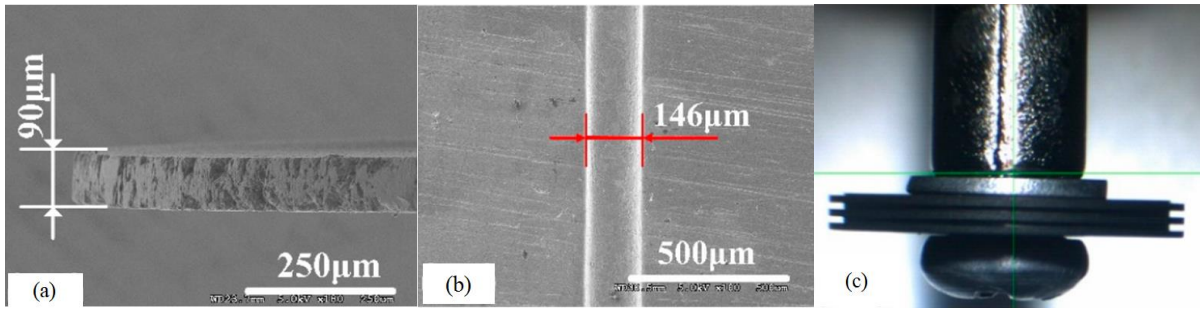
(a) Single disk tool, (b) fabricated microgroove, and (c) array of disks tool [27]
